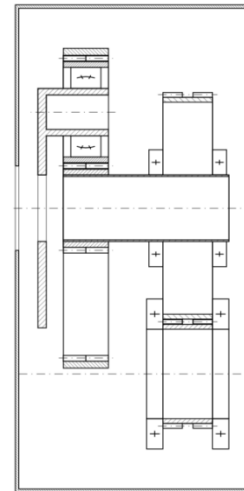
Combined spur-planetary Gearbox from GtGearbox
